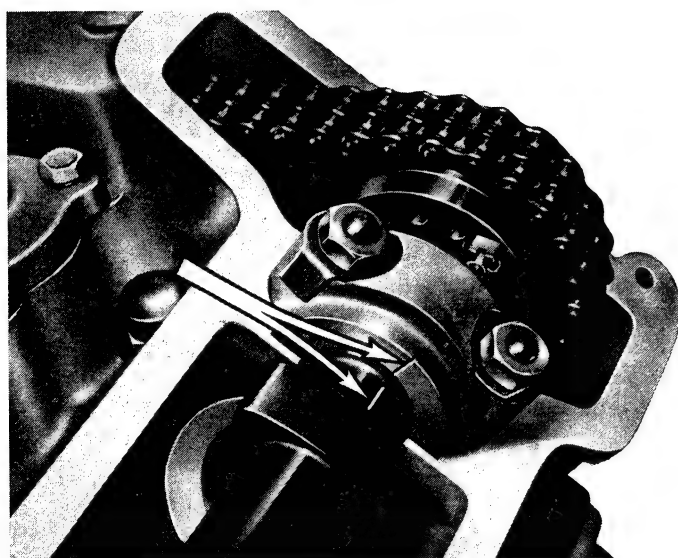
Timing marks on camshaft and bearing - engine 118 B.000.
